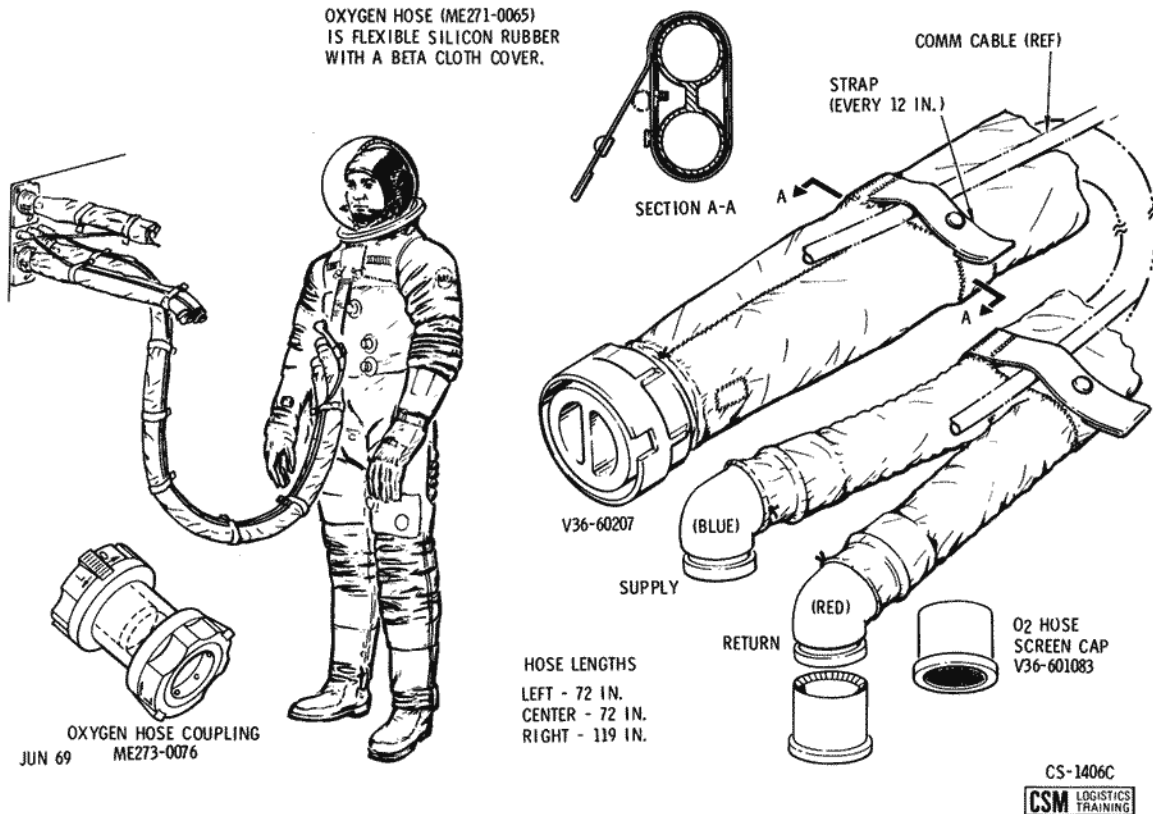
Oxygen Hose Assembly and Accessories
